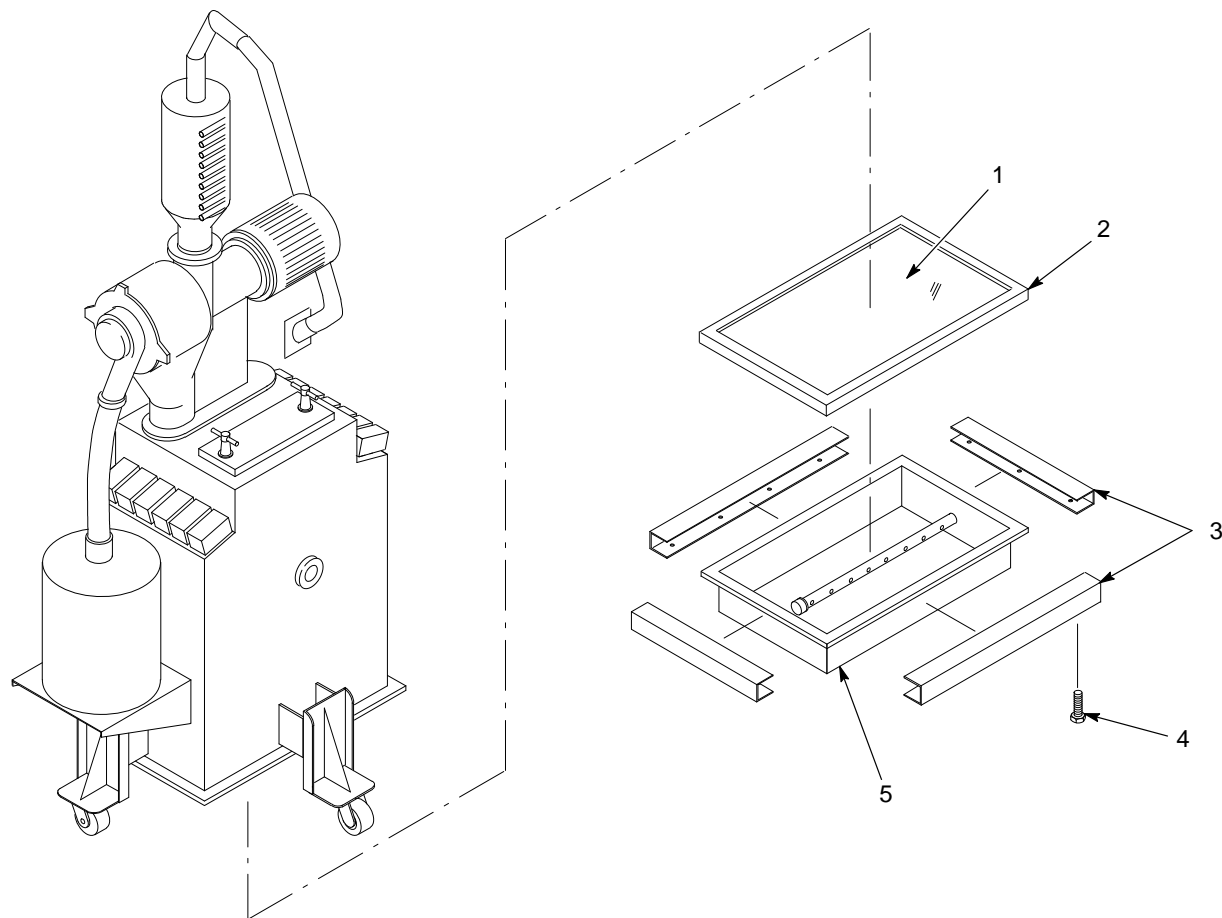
Feed Hopper Fluidizing Plate Replacement
